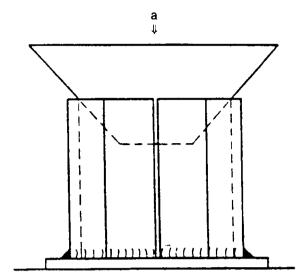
Preparation and fracture testing of test specimens for fillet welds on pipe
